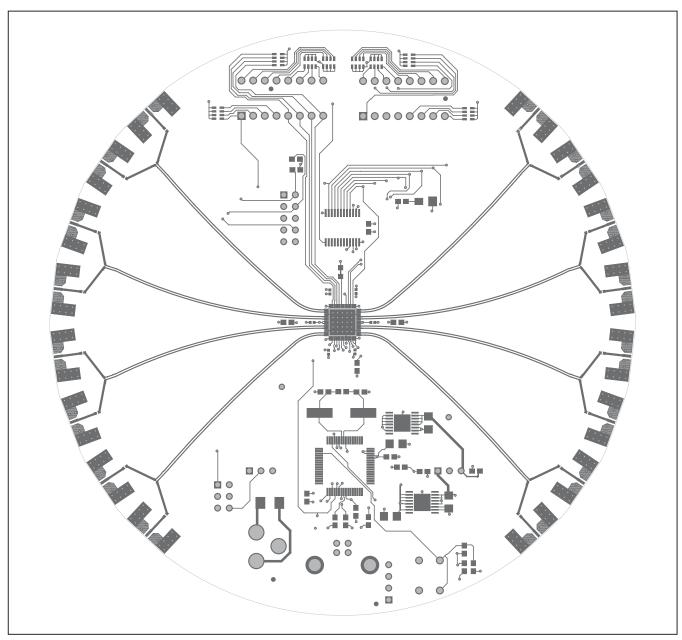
MAX3987 EV Kit PCB Layout—Component Side (Sheet 1 of 4)
